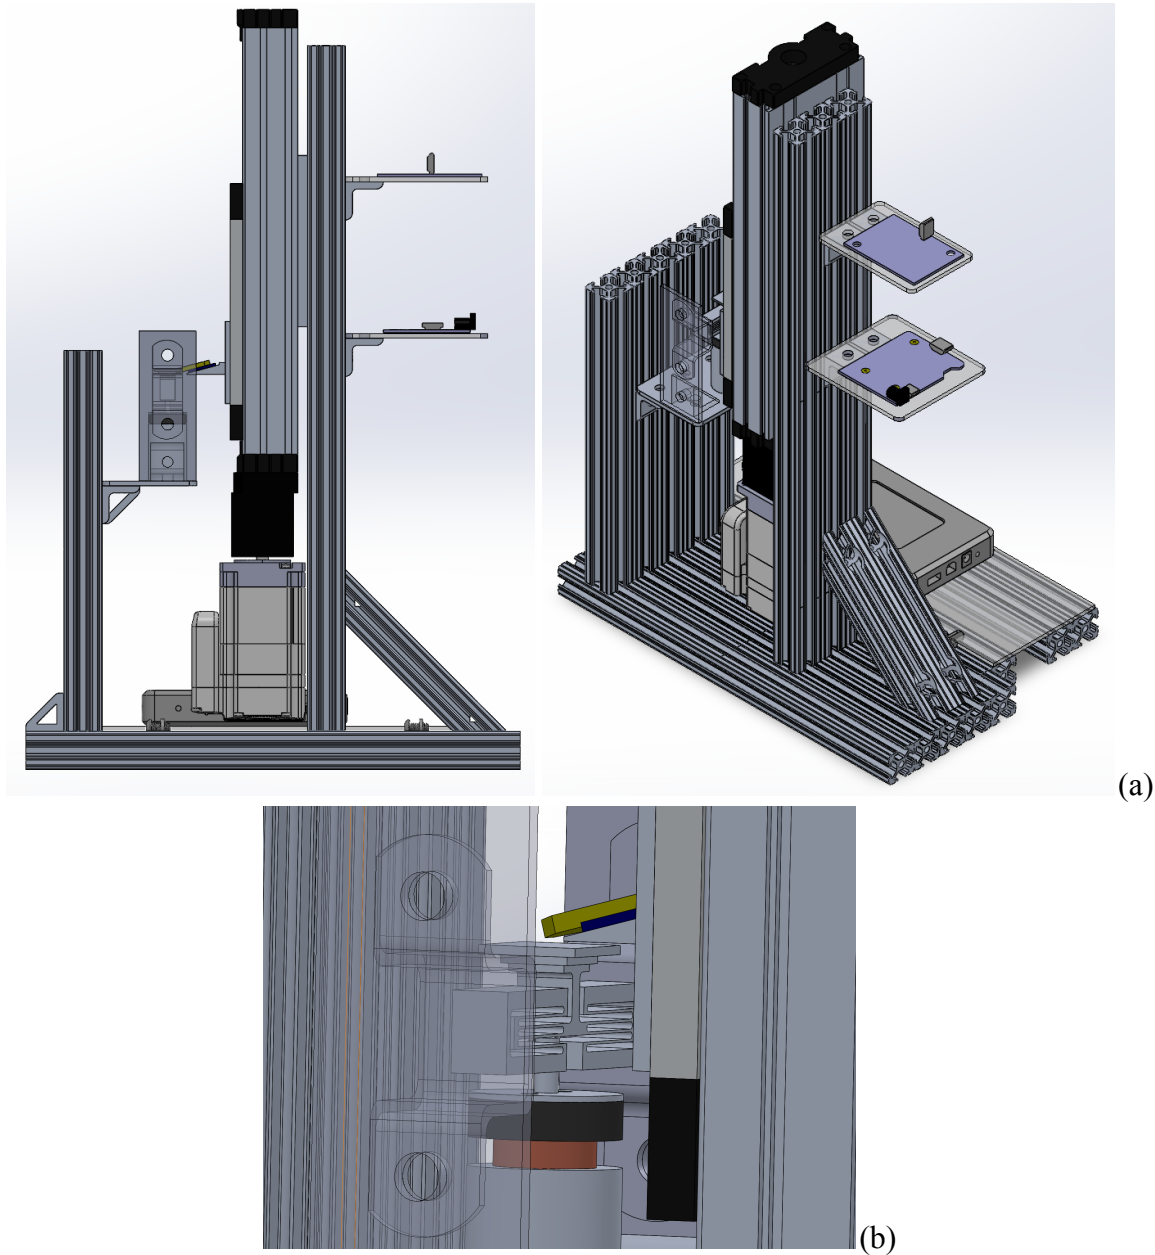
(a) Overall View of Leading Concept Design using a Voice Coil and Flexure Mechanism, (b) Close Up of Voice Coil and Flexure Mechanism.
